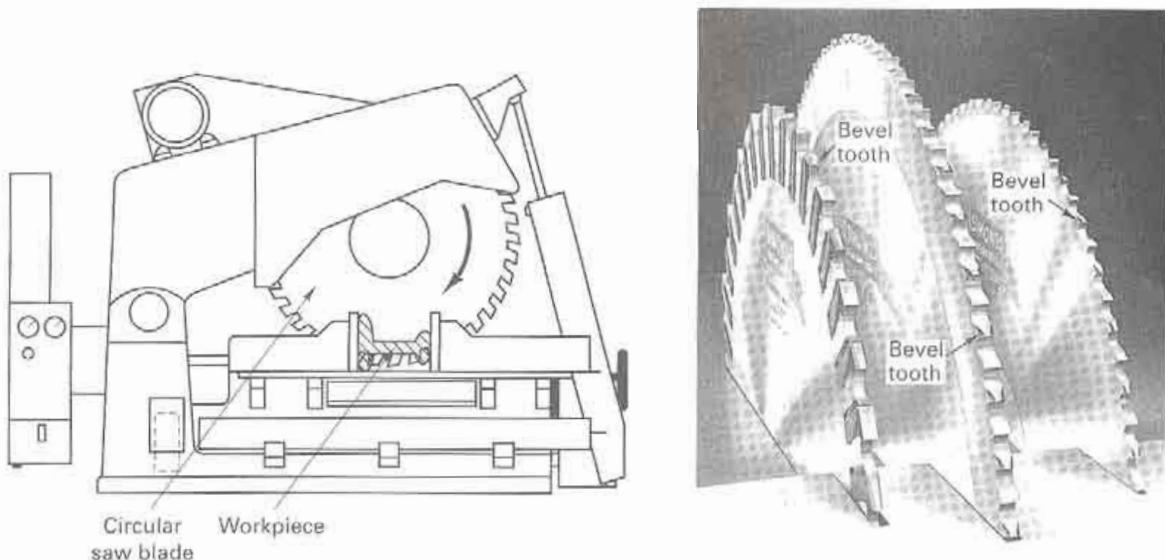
Circular sawing a structural shape, using (*left to right*) an insert tooth, a segmental tooth, and an integral-tooth circular saw blade.
